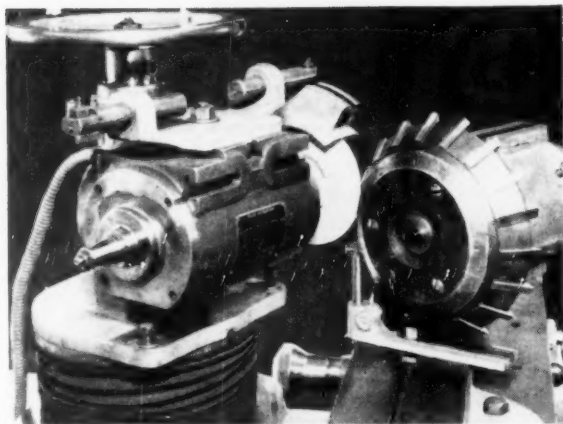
A bearing manufacturer is grinding railroad bearing sleeves of hard SAE 52100 steel, 9" bore, 8" width, stock removal .070" to .080". On former wheels 8 or 9 dressings were necessary to grind one bearing. Alundum ground each bearing without dressing, although usual procedure is to dress once during roughing and again before the finish pass of .002".
